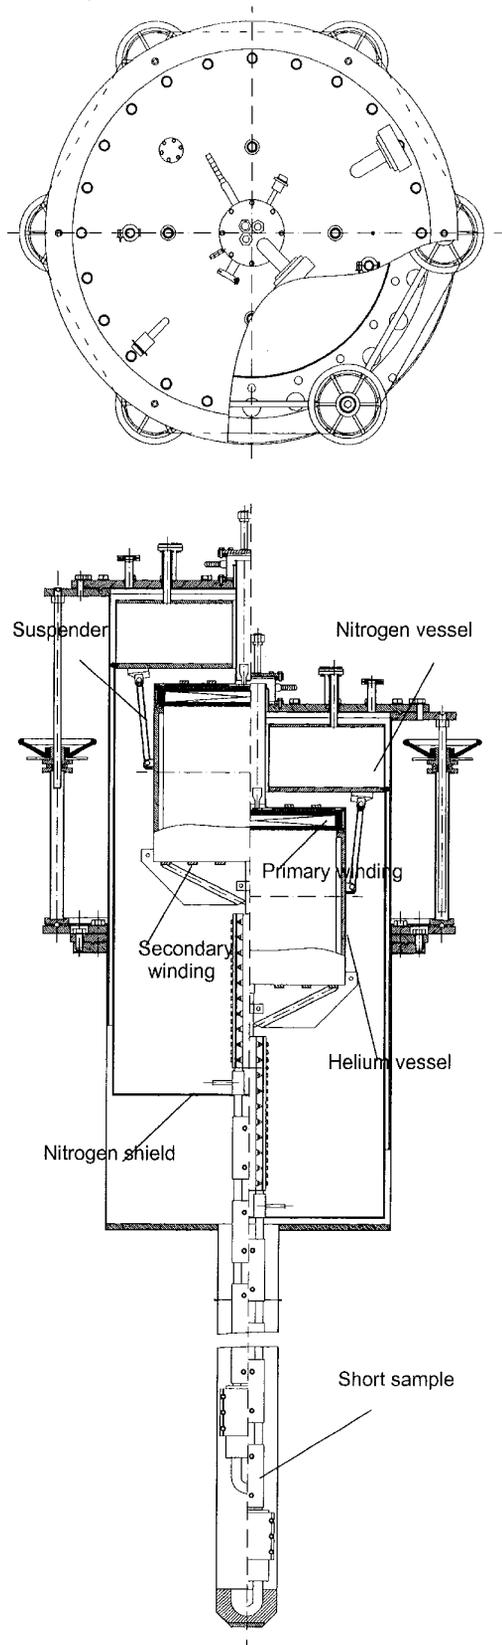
Superconducting Transformer design; top view and side view. Note that left half drawing shows the upper boundary state of superconducting transformer.
